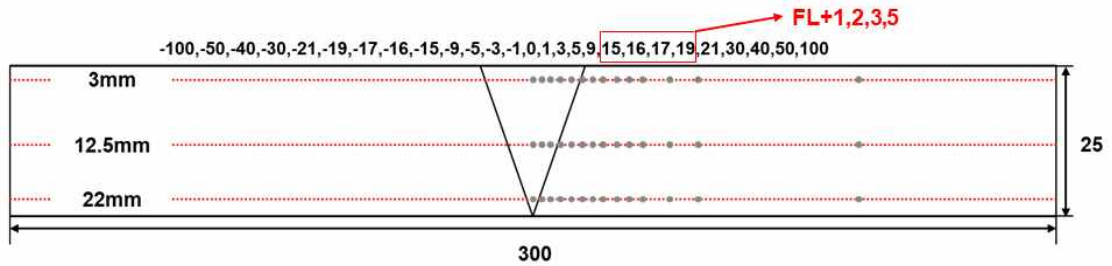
Neutron diffraction measurement points for constrained weld specimen
